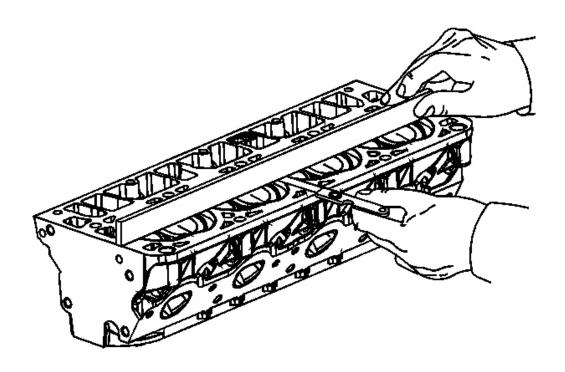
Inspecting Cylinder Head For Warpage Courtesy of GENERAL MOTORS CORP.
